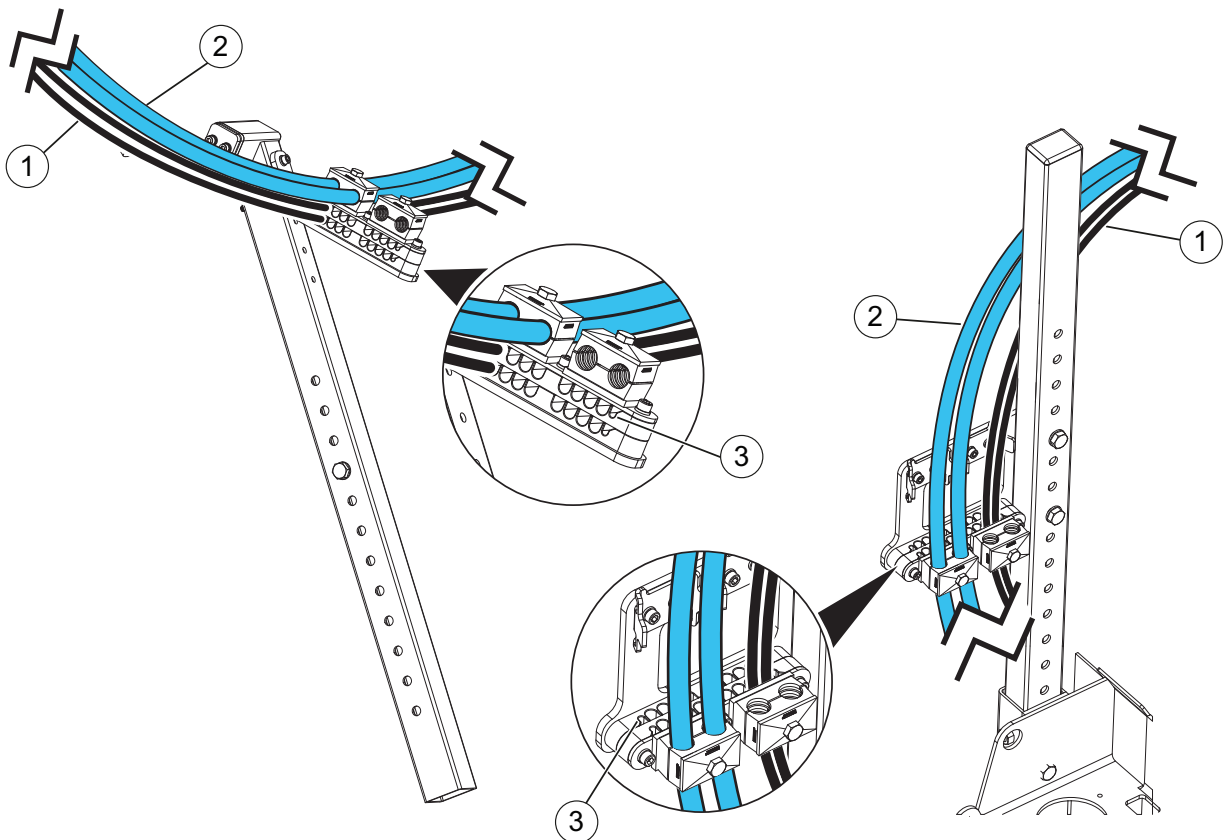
Lamp Cables and Hydraulic Hoses Routing
